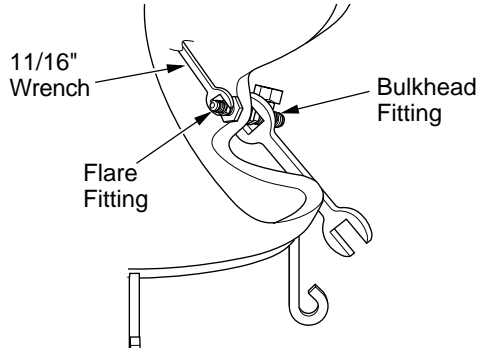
Connecting Gas to ApplianceGAS VALVE CONNECTION
